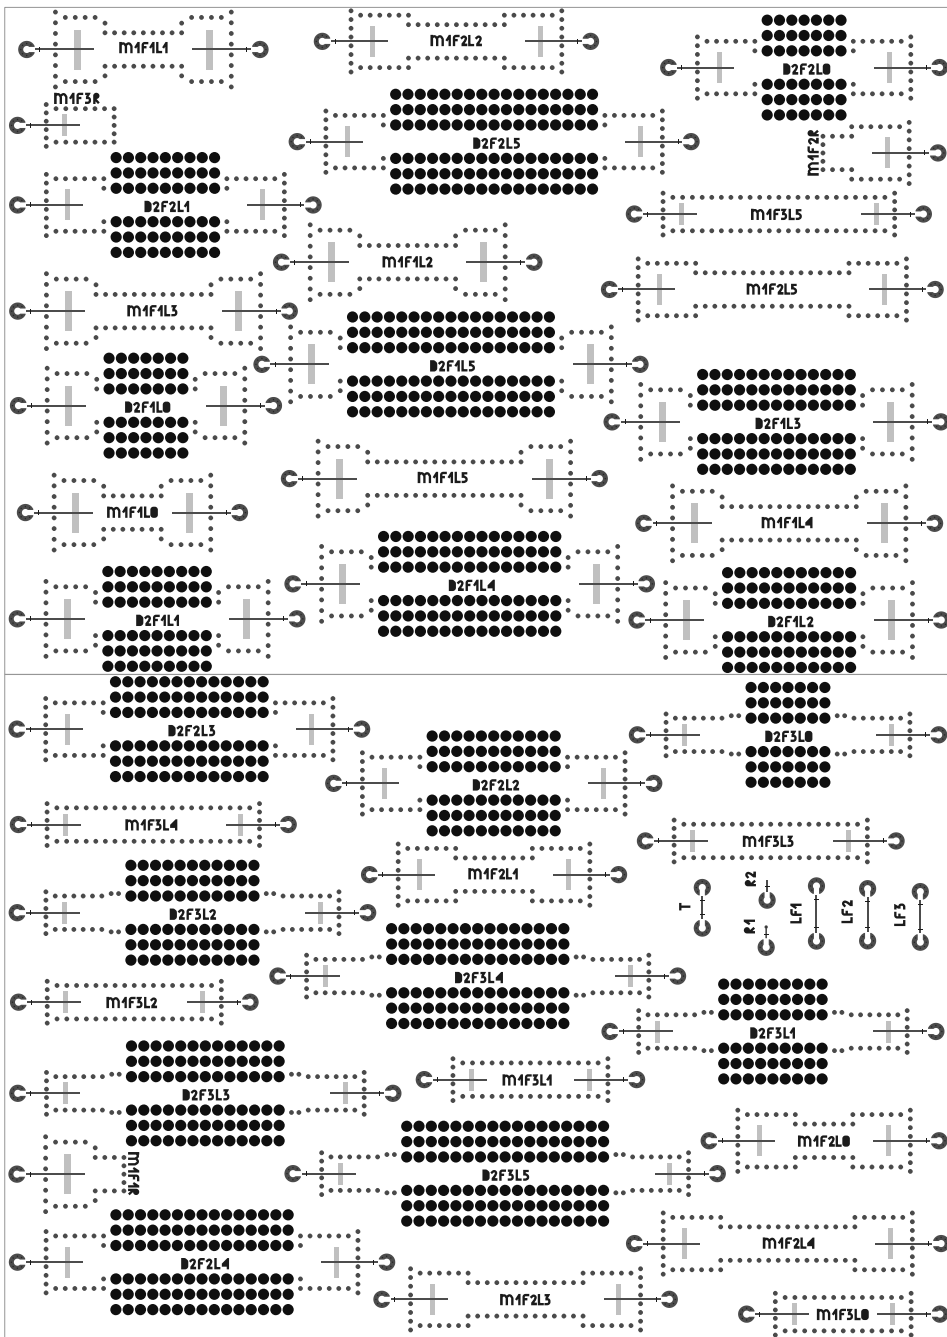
Top view of the layout design of the complete printed circuit board.
